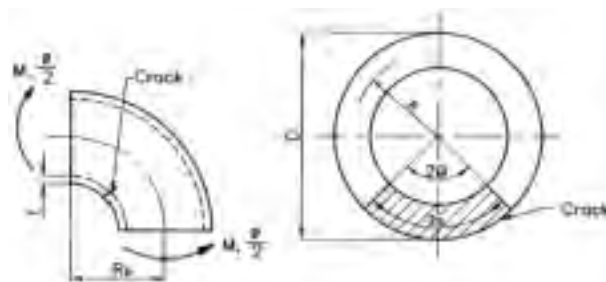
Sketch of elbow with through wall circumferential crack at the intrados
